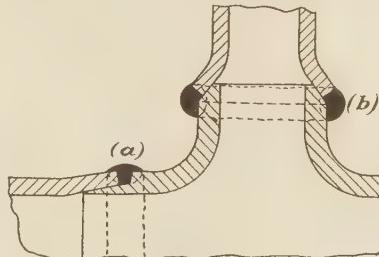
(a) TAPER-WELD CONNECTION TO FITTING. (b) SHORT BELL-AND-SPIGOT LINE OR FITTING CONNECTION
